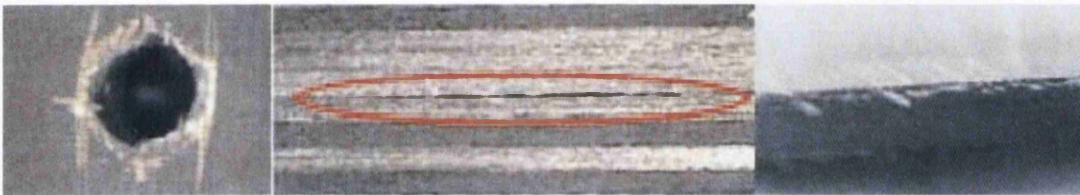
Machining damage to a composite laminate, from left to right: breakout damage from hole drilling, delamination and flaking after milling [45]
